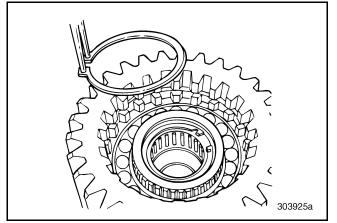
Removing Smaller Mainshaft Snap Ring (T313L/T318L Shown)
